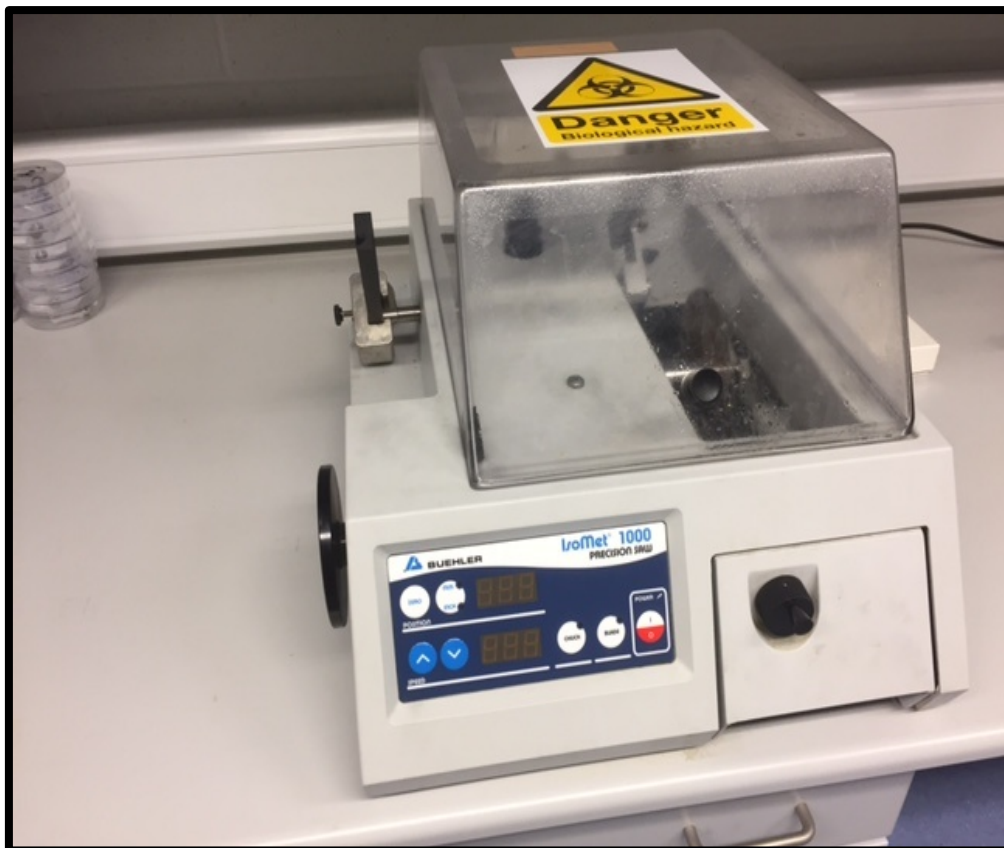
Isomet 1000 series sectioning machine used to cut the coated samples.
